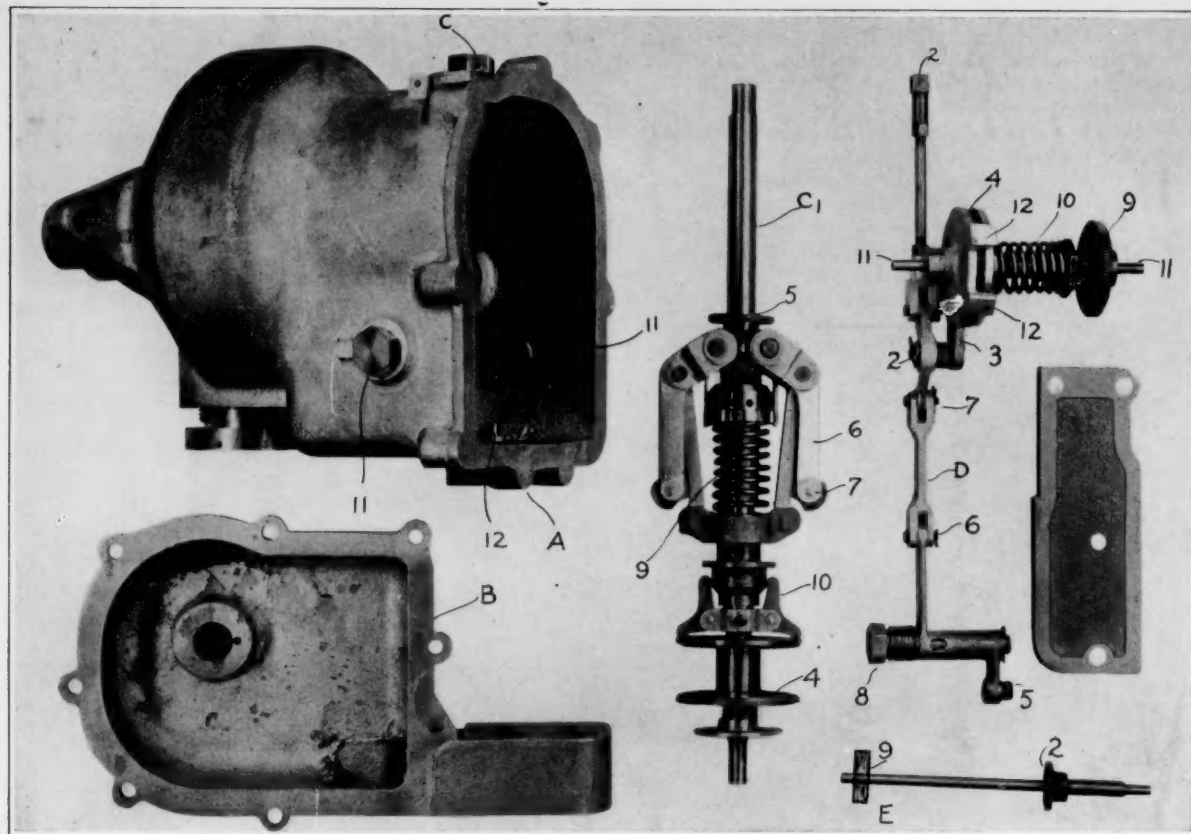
EXPLODED VIEW OF THE FORM OF GOVERNOR SHOWN IN FIG. 7
